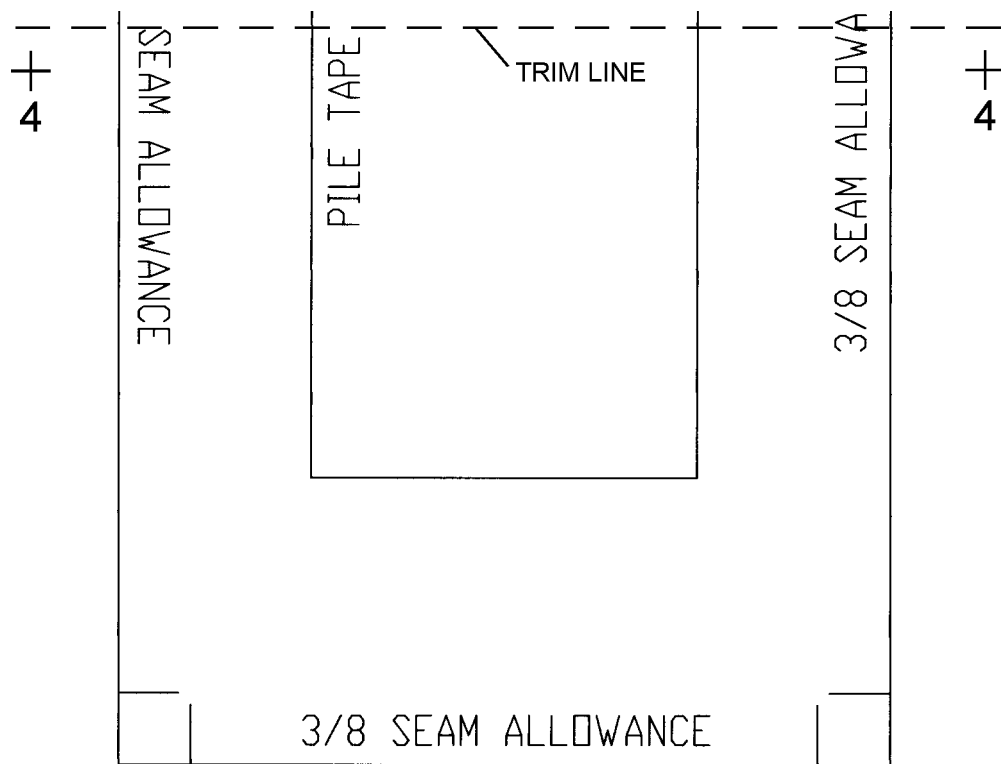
H. Flare Pocket Front Side Panel Pattern (Sheet 5 of 5)
